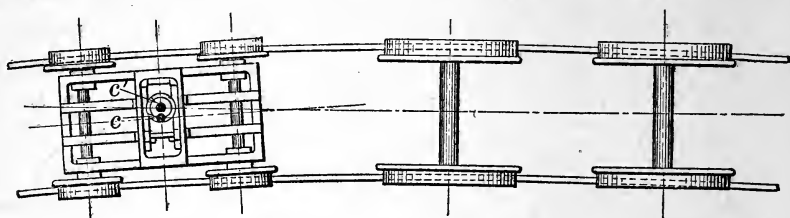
FOUR-WHEELED TRUCK—SHIFTING CENTER.
